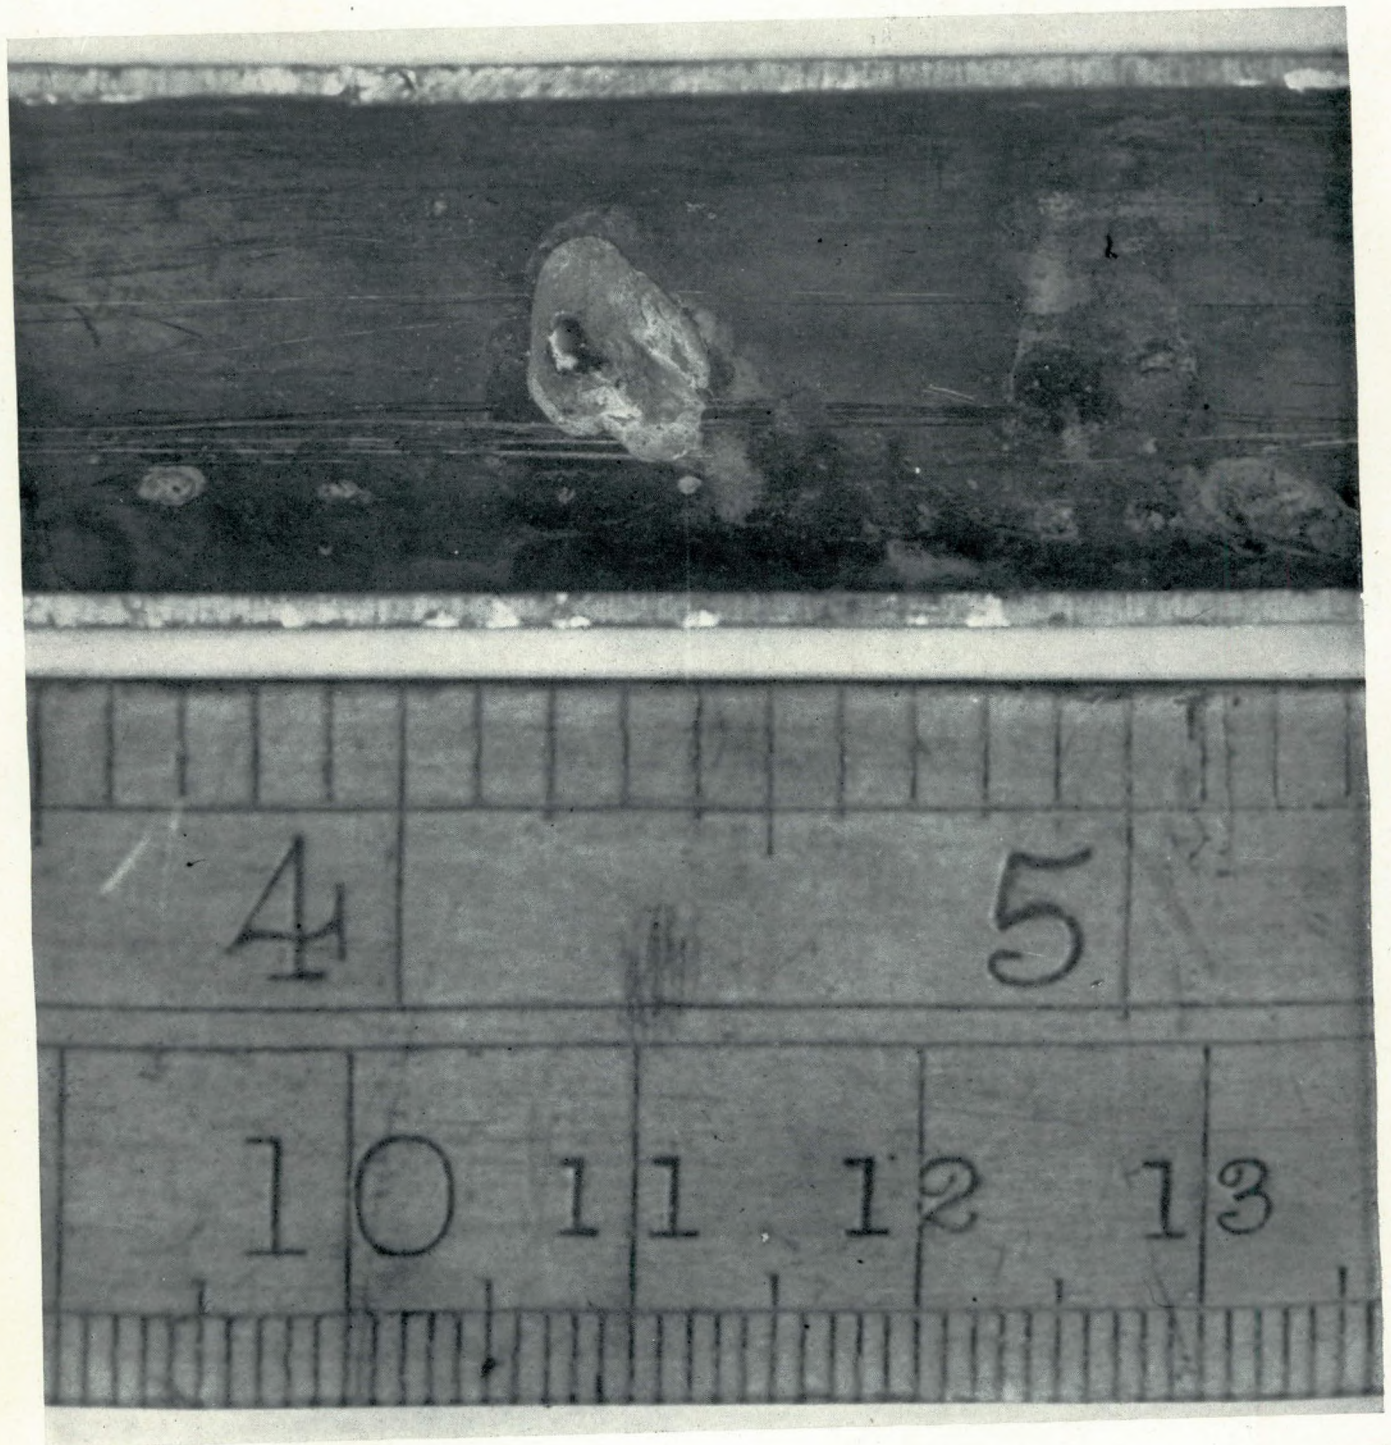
ENLARGED VIEW OF PERFORATION IN ALUMINIUM-BRASS TUBE
